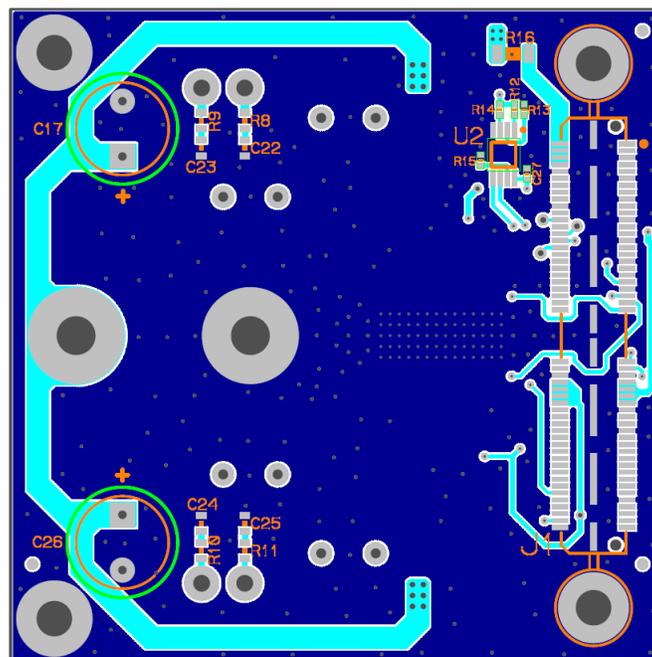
TAS5766MDCAEVM Bottom Composite Assembly
